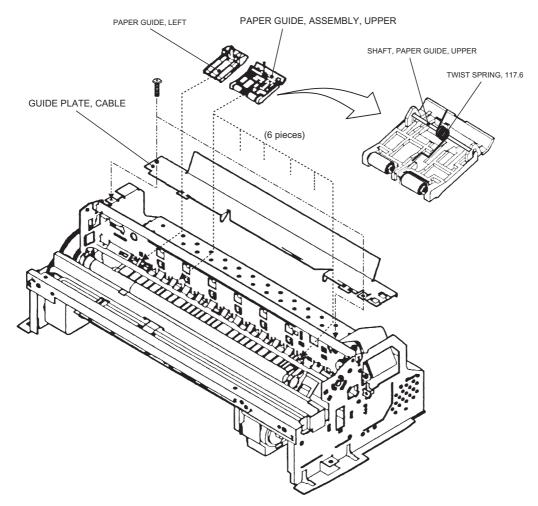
PAPER GUIDE ASSEMBLY Removal
